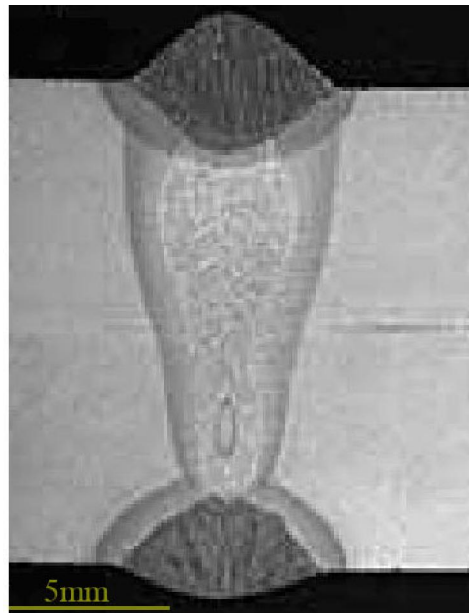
Section through pipe wall, showing internal GMAW root run, 9.0 kW autogenous laser fill and GMAW capping pass [196]
